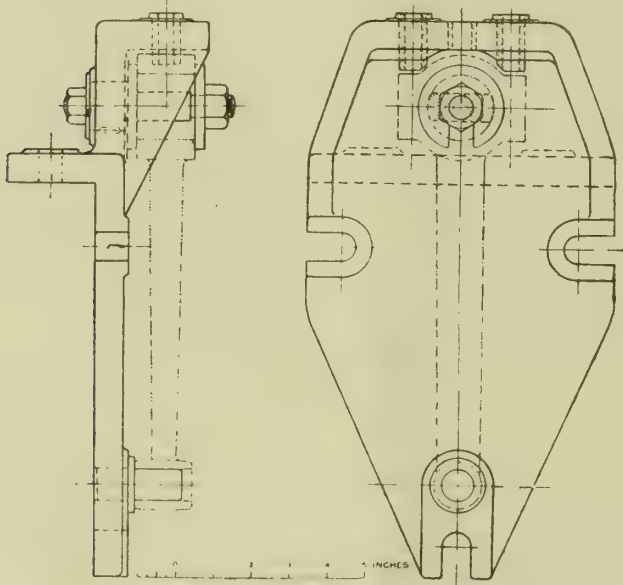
Jig for Drilling Bolt holes in Connecting Rod
